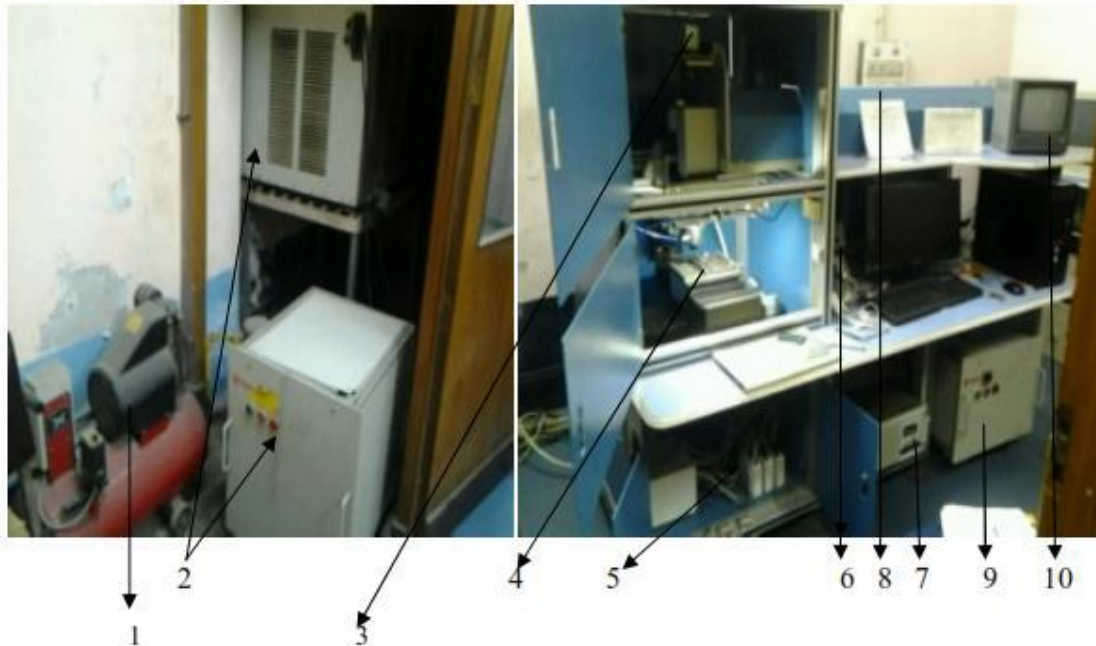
Pictorial image of Nd:YAG laser machining system with subsystems, (1. Air compressor, 2. Outer water cooler unit & Heat exchanger unit, 3. Z axis mounted CCD camera, 4. CNC controlled machining table, 5. CNC controller unit. 6. RF Q-switch driver unit, 7. Lamp current controller unit. 8. Laser head. 9. Inner chiller unit, 10. Monitor.)
